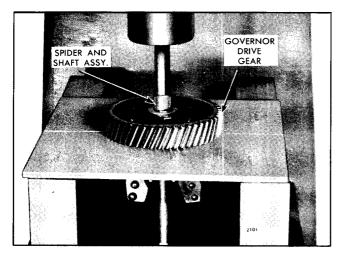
Removing Drive Gear from Spider and Shaft Assembly
